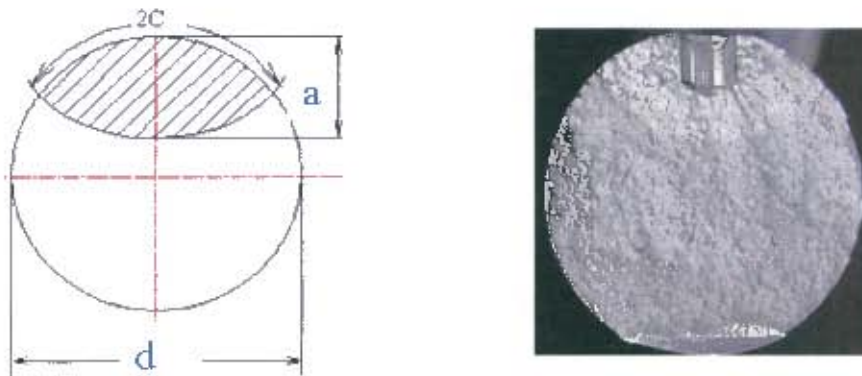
Measurement of fatigue crack recorded for thumbnail specimens.
